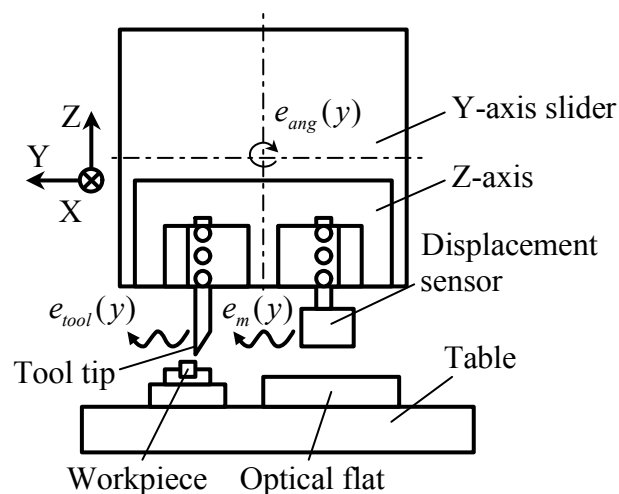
Schematic drawing of the measurement of tool motions.
